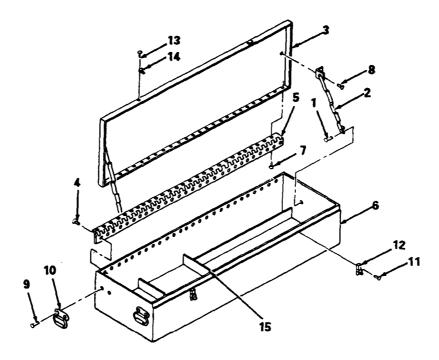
Suspension and Packing Kits Chest Assembly Repair.
